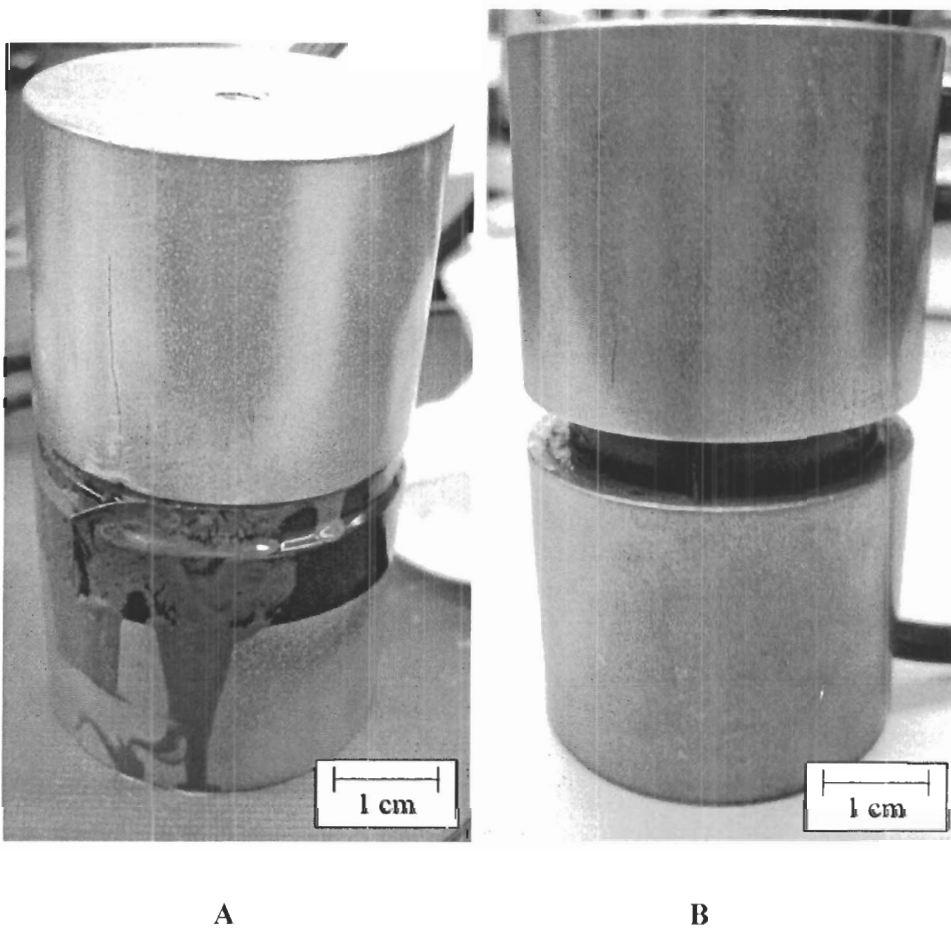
Post-curing EFC Damper and Electromagnet Assembly, Pre (A) and Post (B) Mould Removal
